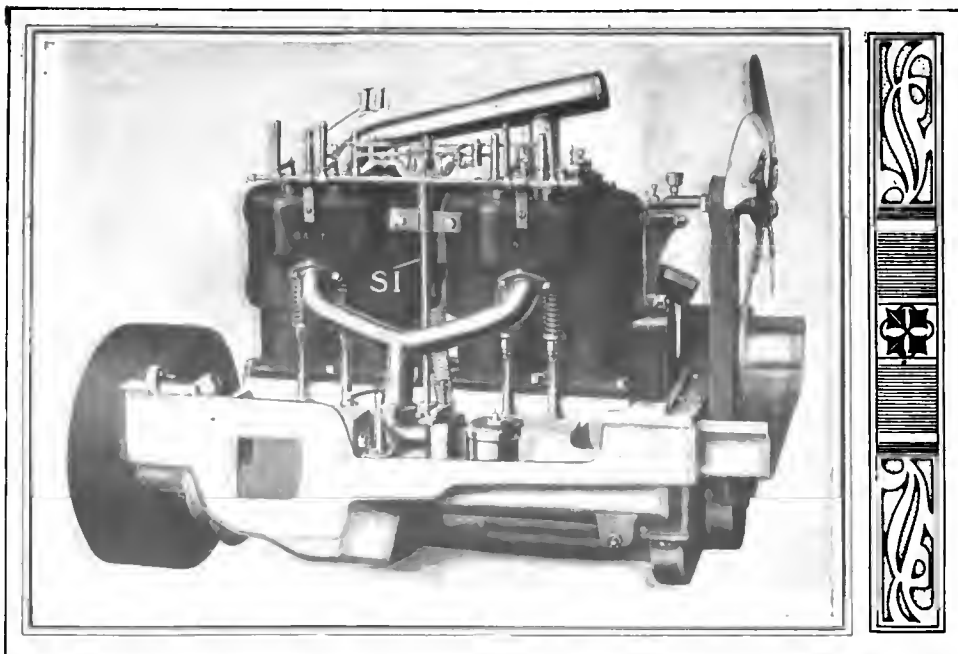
Make-and-break ignition system actuated by a vertical shaft
